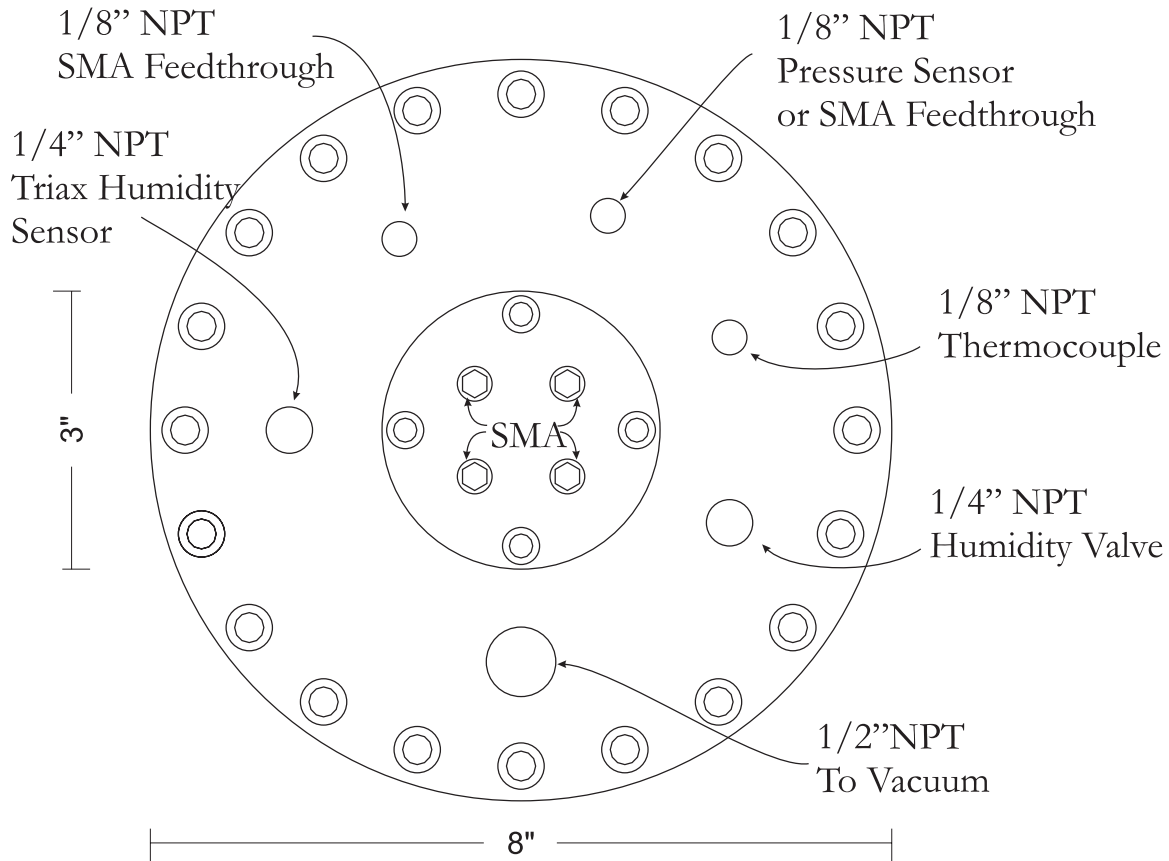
Schematic for the top flange for the small chamber. The flange is attached with 20 bolts.
